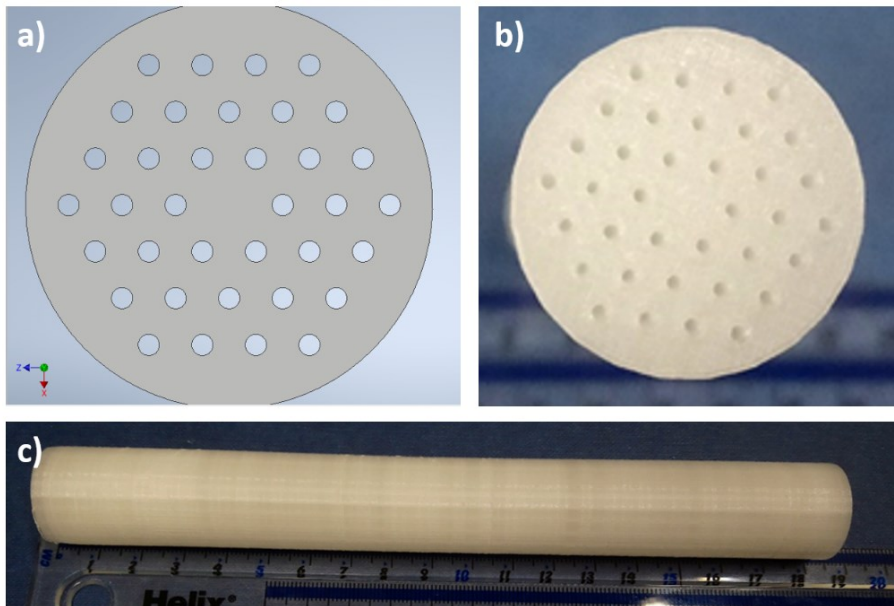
3D printed COC preform using hexagonal PCF design; a) CAD model; b) cross-sectional image of the printed preform; and c) image of the longitudinal section.
